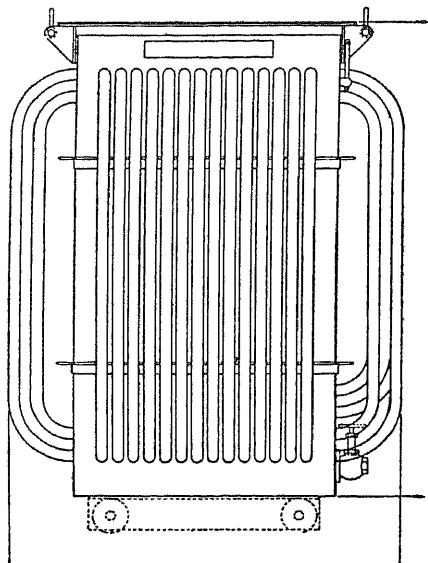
Boiler-iron Tank fitted with External Cooling Tubes
